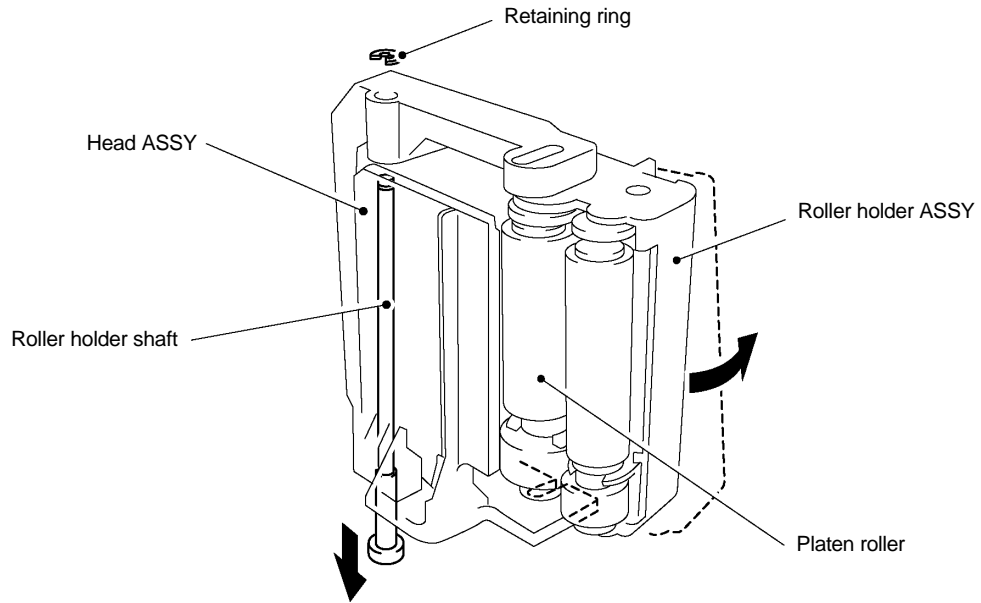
Disassembling the Head/Roller Holder Unit (1)
